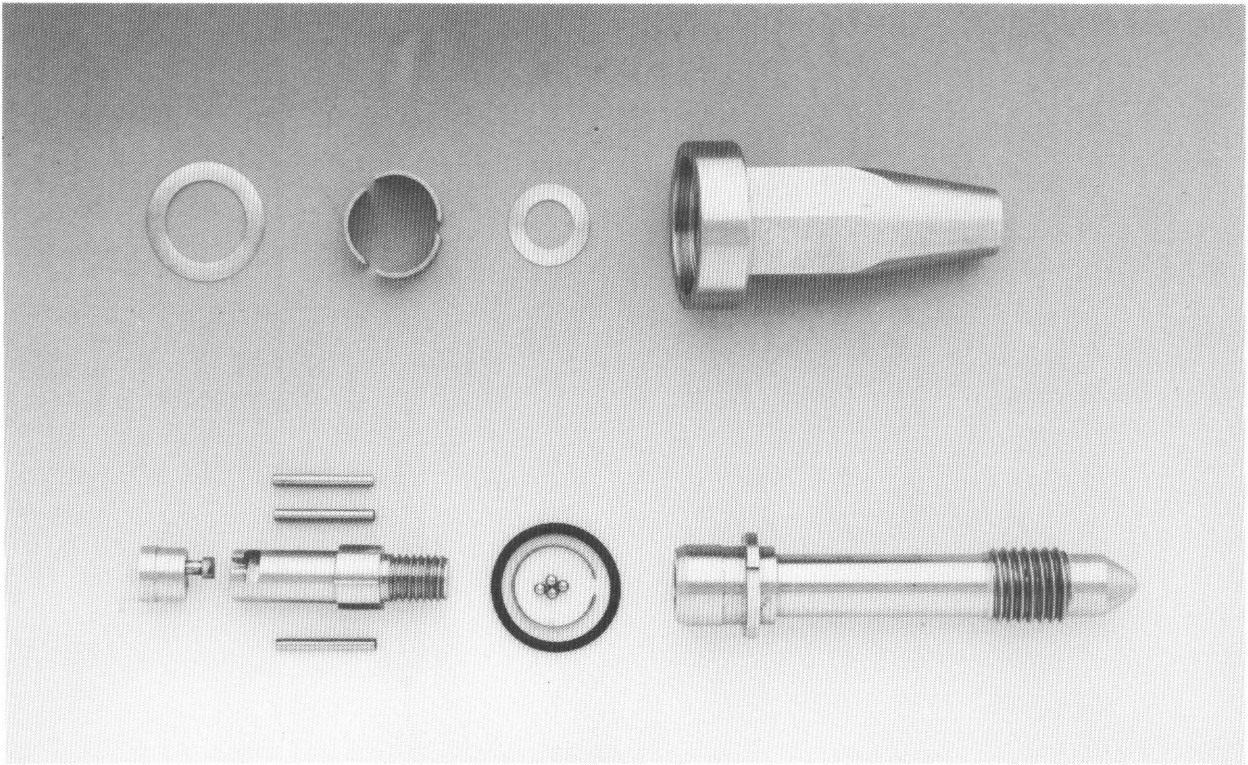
Mechanical parts of a Sealing Bolt MK4r
